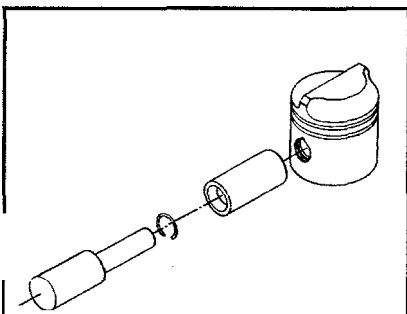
If available, you can use a shouldered driver to install the wrist pin retaining ring inside the wrist pin bore
